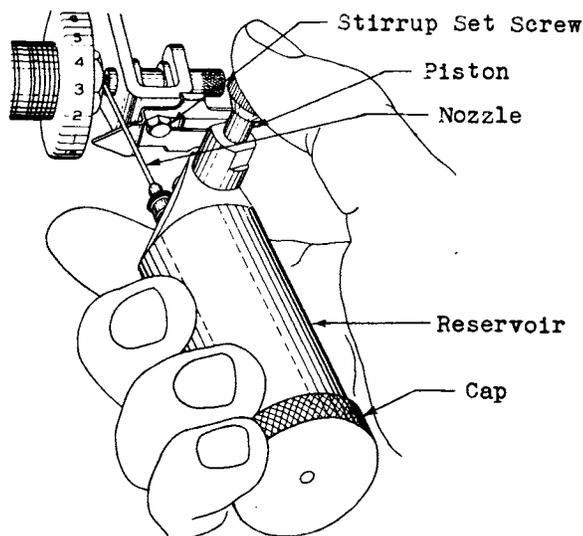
Method of Lubricating Sequence Switch Cam Shaft Bearing at the Stirrup End with the No. 353-B Lubricator
